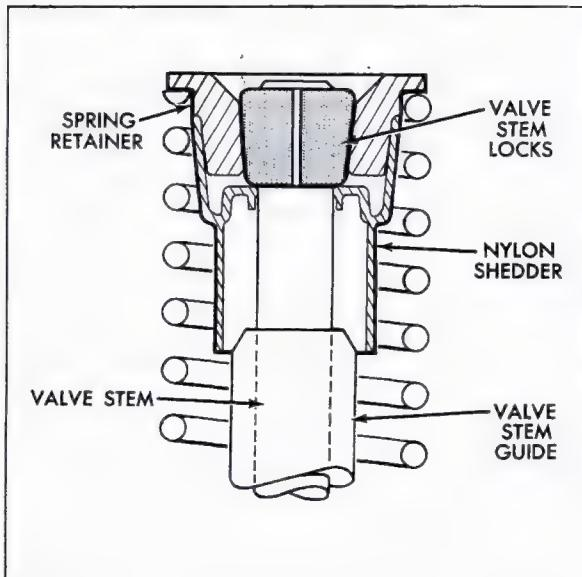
Valve Spring Retainer and Oil Shedder
